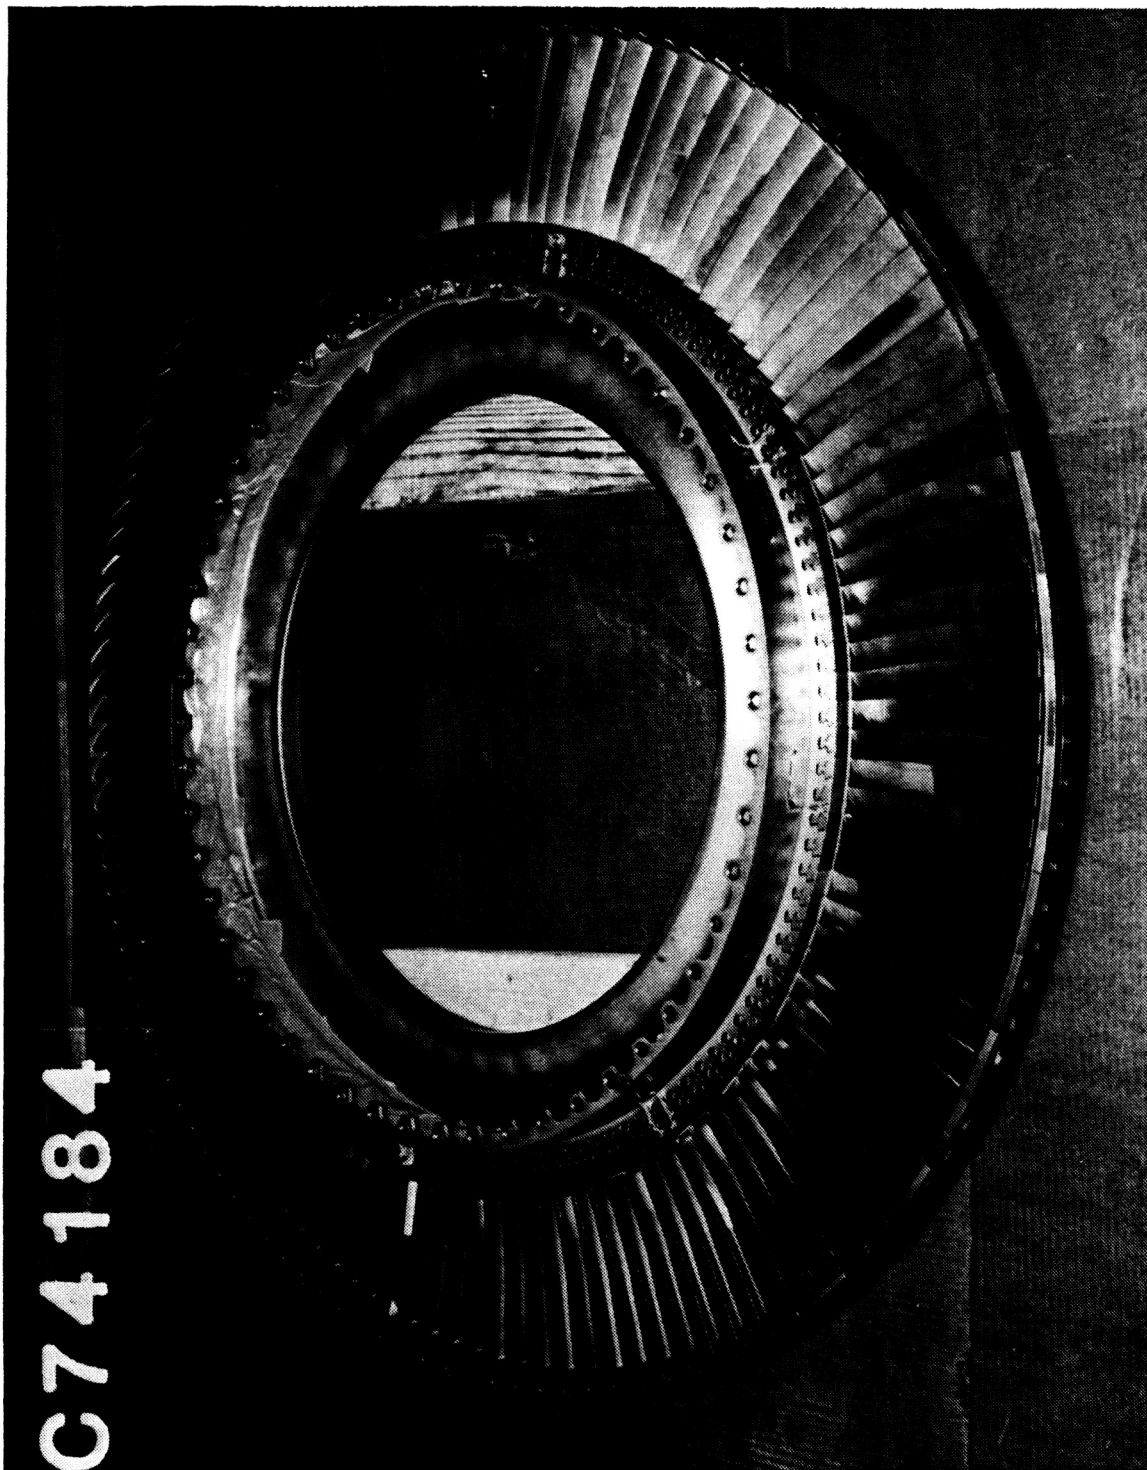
LPT Stage 3 Rotor Assembly (Aft Side).
